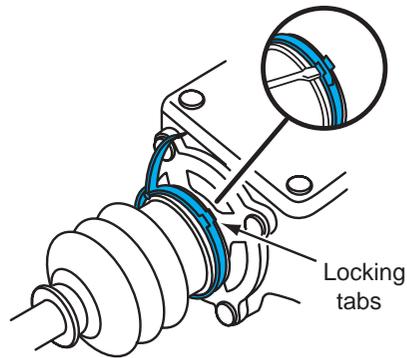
Tightening and staking the inner tie-rod boot clamps.
